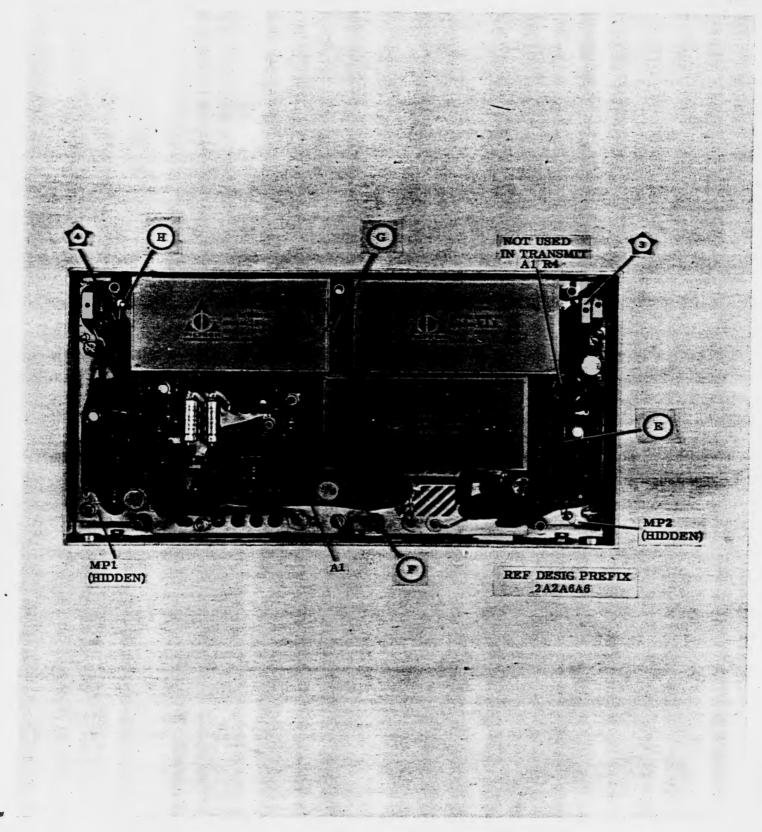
RF Translator Electronic Subassembly, Component Location
